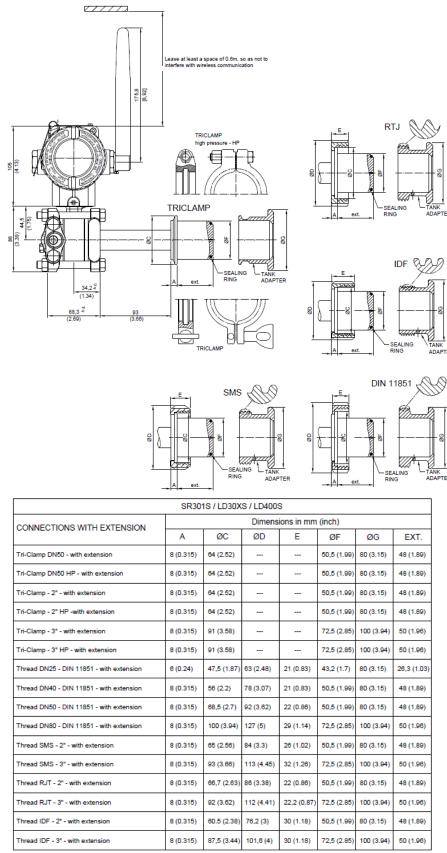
(d) – Dimensional Drawing and Mounting Position for the LD400 WirelessHART™ – Sanitary Transmitter with Extension
